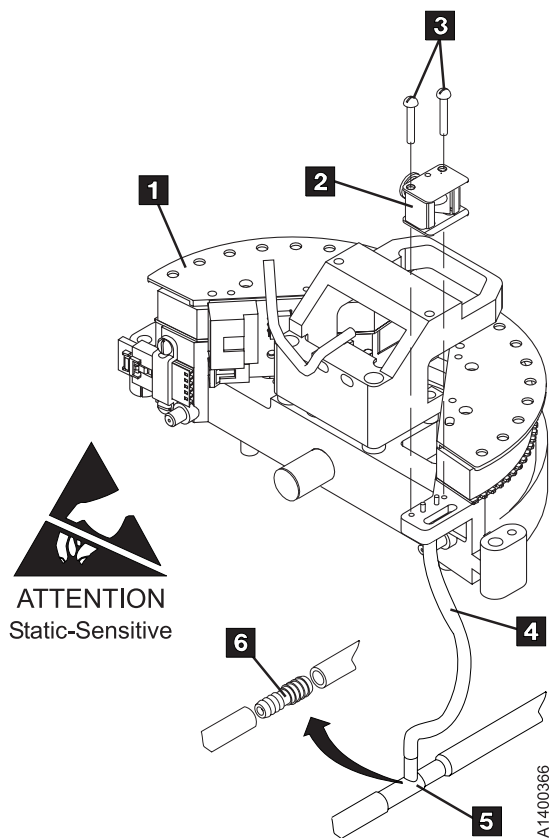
Cleaner Blade Removal – During Head Guide and Brush Removal
